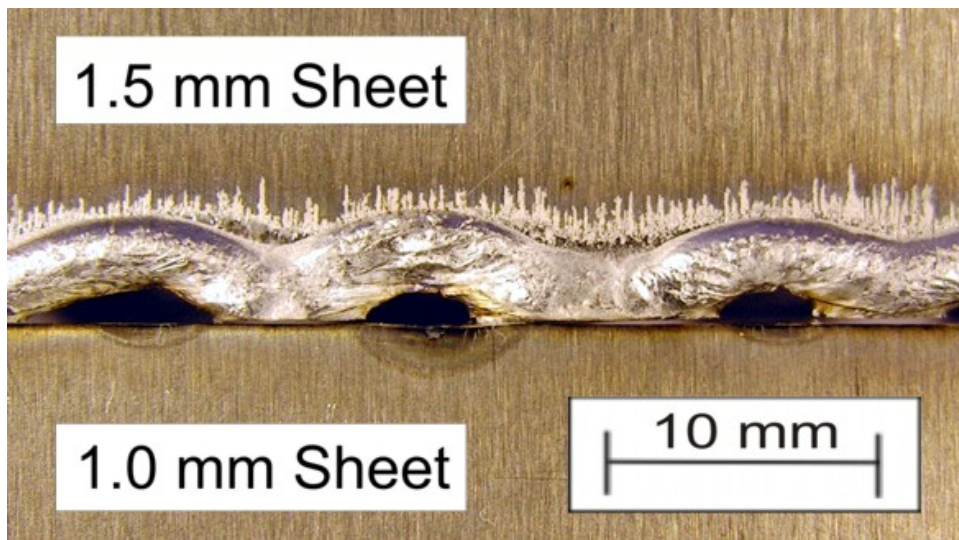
Top surface of a weld produced using a 75 J/mm net heat input and a 2 mm torch offset towards the thicker sheet showing blowholes from
